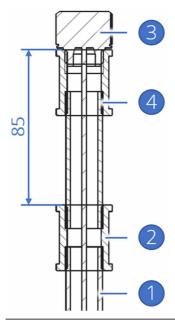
mechanical oil dipstick – installation angle 34,1° bis 35,6°
